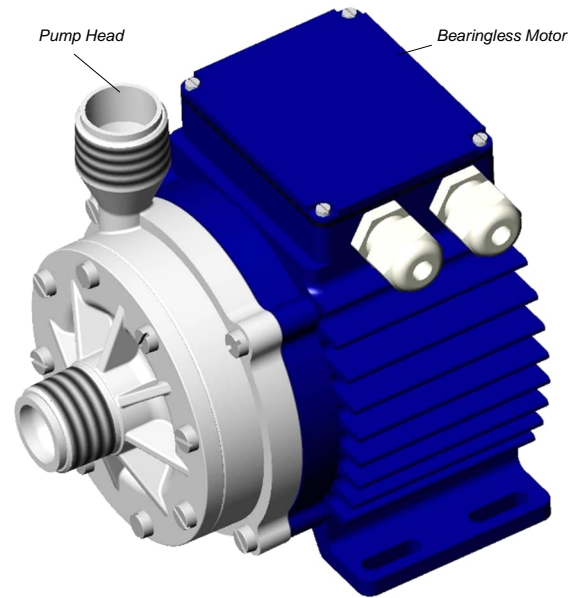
Bearingless motor with pump head LPP-600.13 (PVDF)
